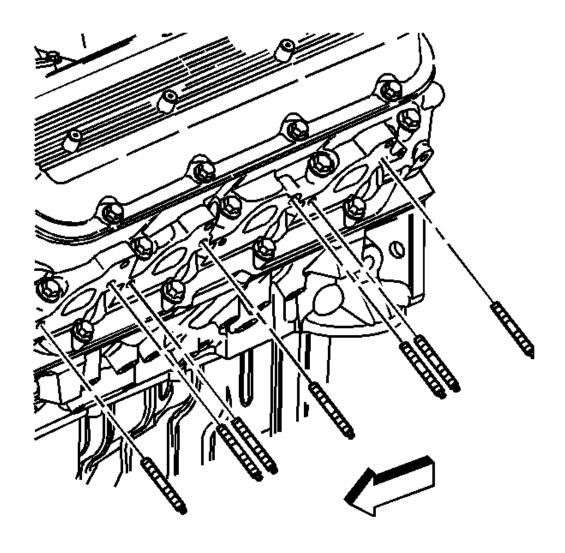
View Of Exhaust Manifold Studs Courtesy of GENERAL MOTORS CORP.
